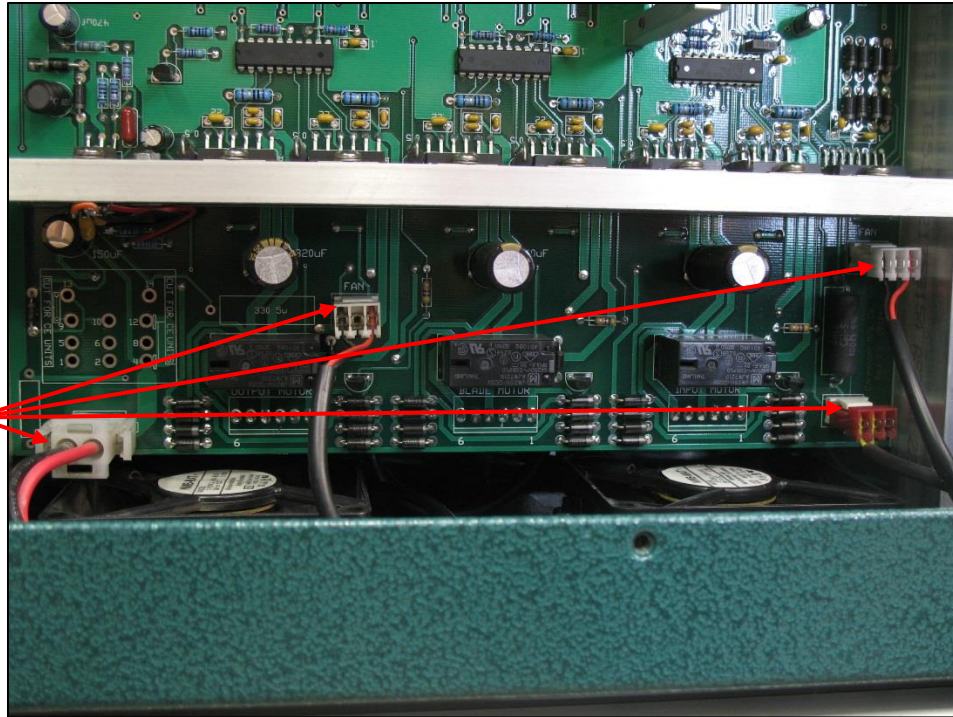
PN 8928 and PN 9584 Cables Installed to PN 8953 Jack Cover
